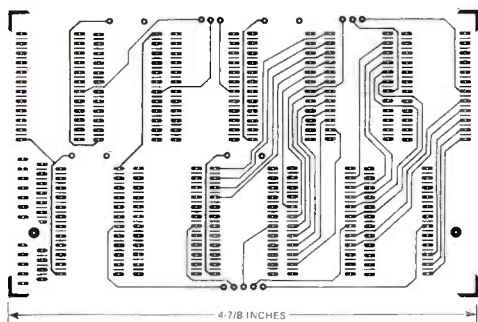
THE FOIL PATTERN for the component side of the memory board is shown here half size.
